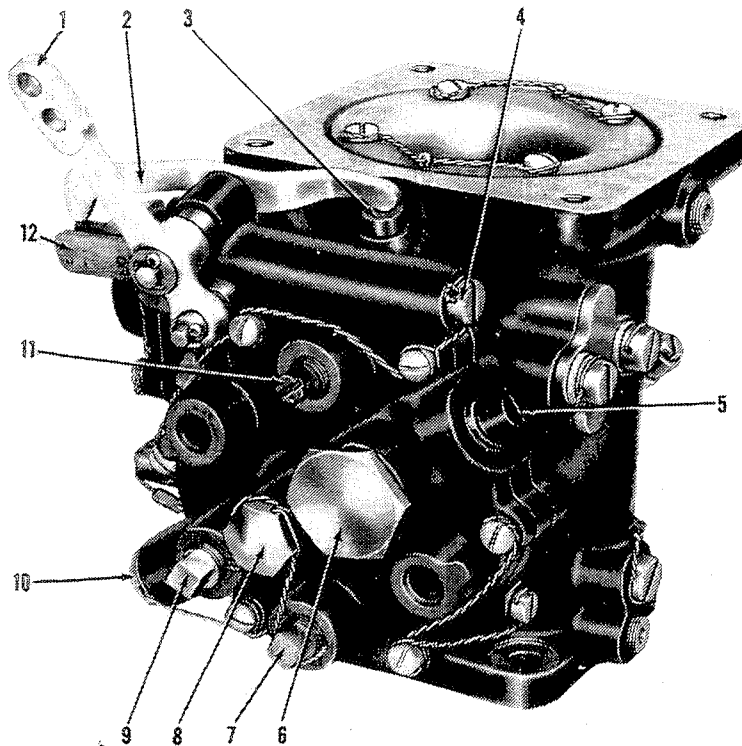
THREE-QUARTER RIGHT FRONT VIEW OF STROMBERG PSD-5C CARBURETOR.
